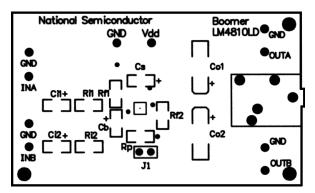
Recommended NGL0008B PC Board Layout Component-Side Silkreen
